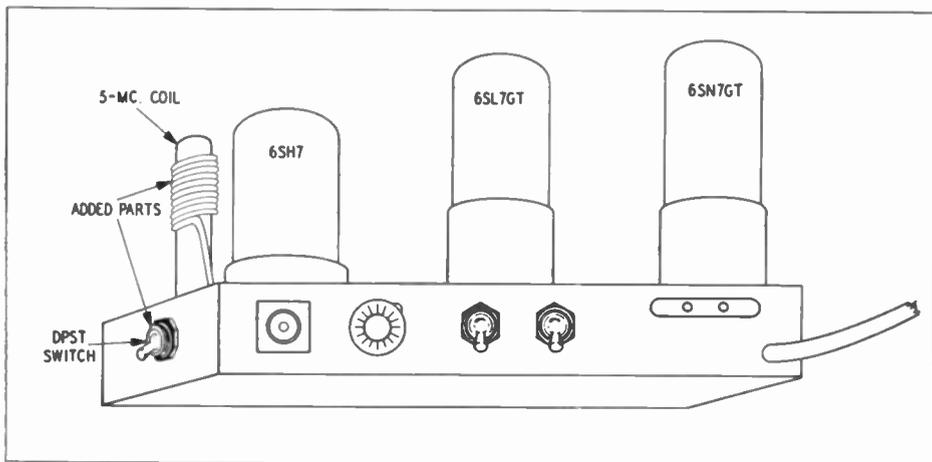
Front View of Modified TS-32(*)/TRC-1, Showing Placement of Added Parts
